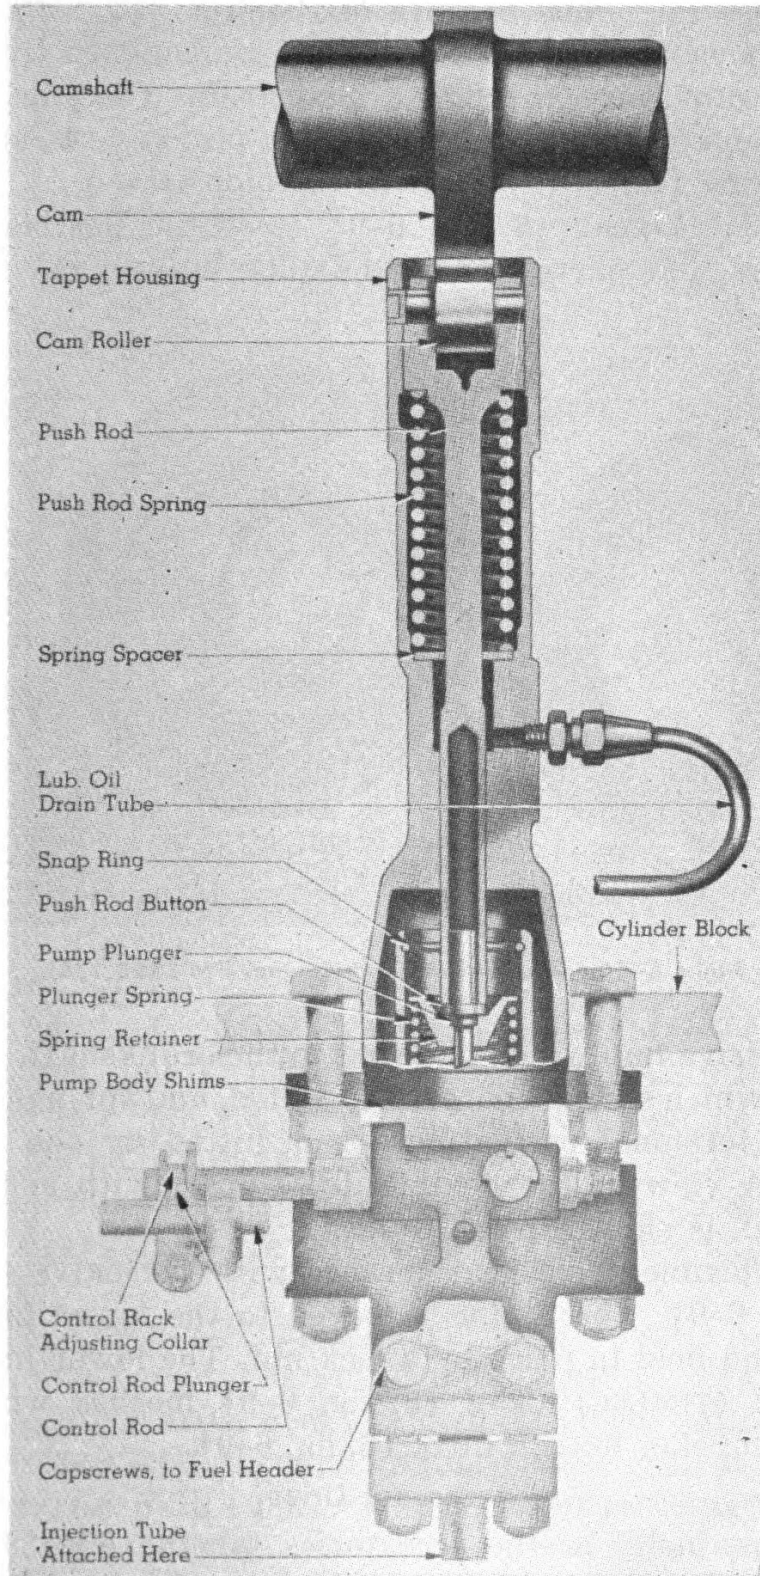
Fuel pump tappet assembly (FM 38D8 1/8).
